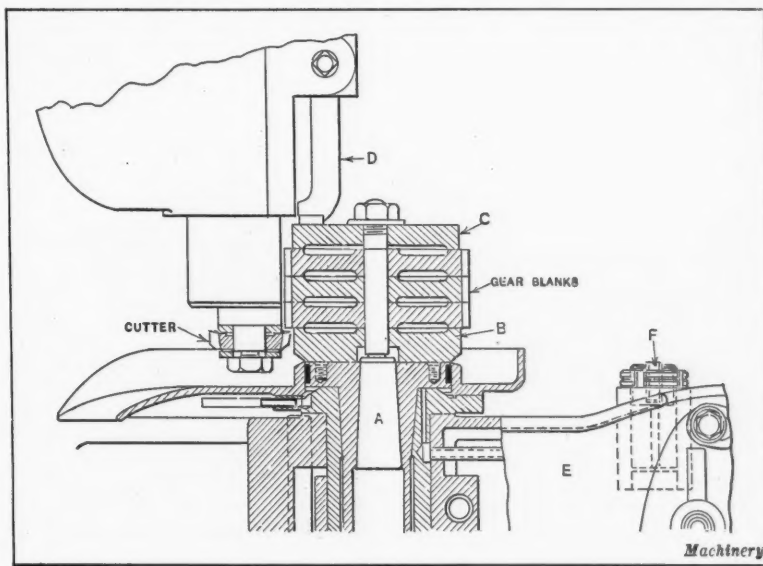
Typical Method of holding Stack of Three Spur Gears
